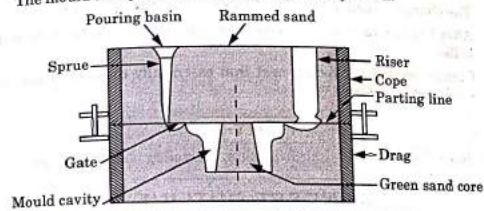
Sectional view through a sand mould showing the elements of a mould.
